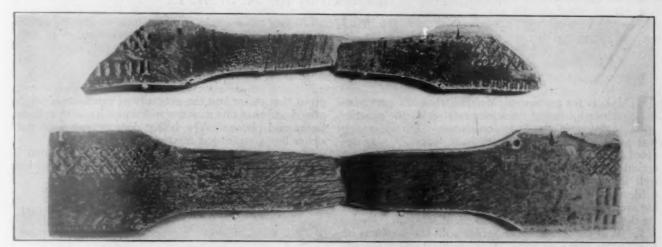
, Top—The test piece, after fracture, showing the water side; Fig. 13, Bottom—The test piece after fracture showing the firebox side of the sheet
